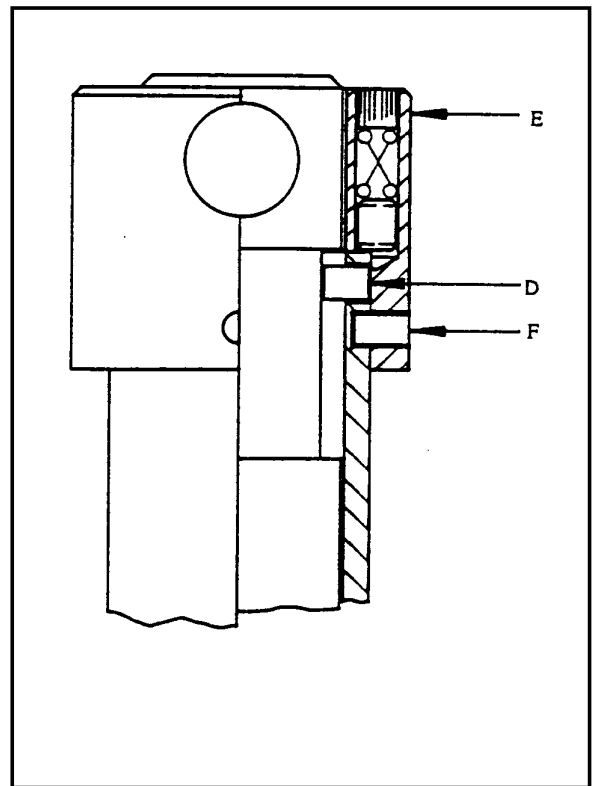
Tap 4 off 3/16" dia. x 1/4" tension pins (D) home to affix bleed tube before attaching ratchet assembly (E) with 4 off 3/16" x 5/16" tension pins (F).
